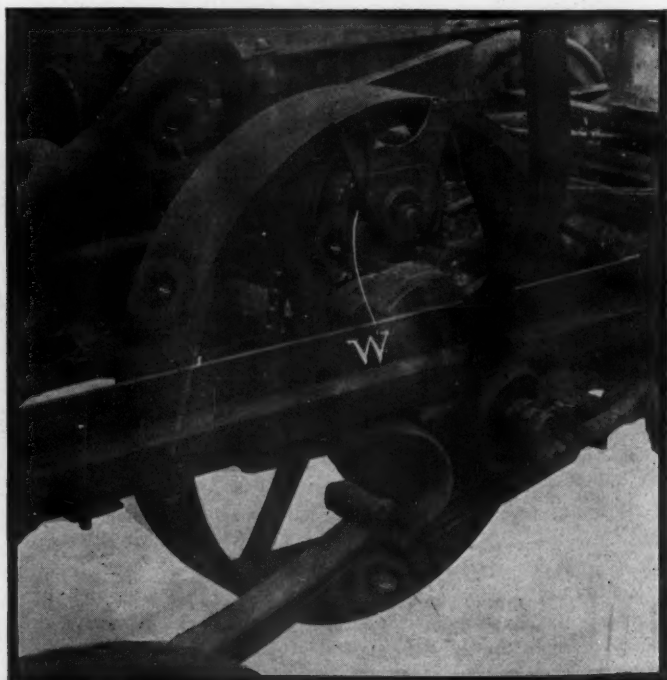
SHOWING MECHANISM SET FOR DIRECT DRIVE
